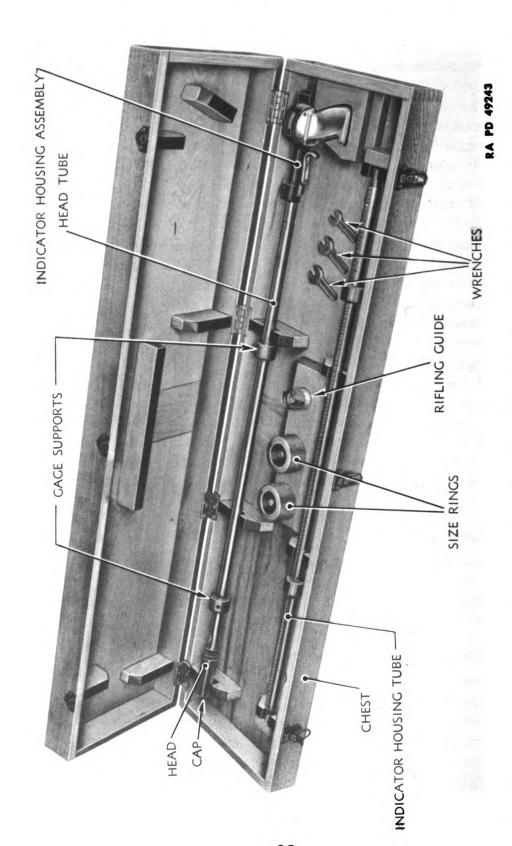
Dial Indicator Star Gage and Accessories in Chest (3-point Cylinder Gage for 37-mm Caliber Guns)
